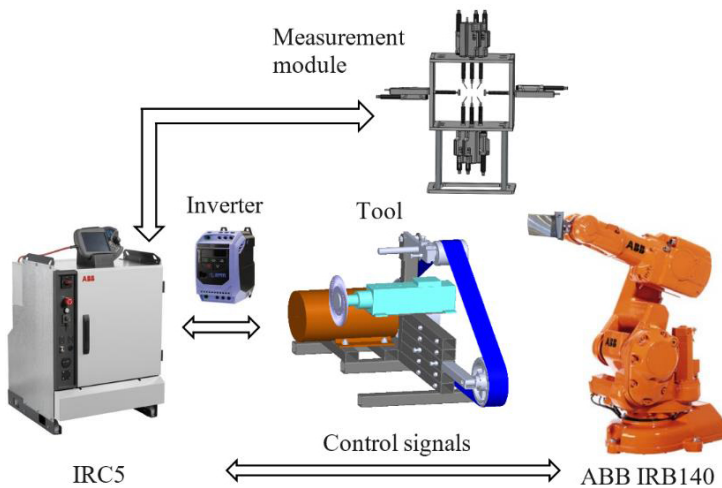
The layout of turbojet engine blades measuring and grinding station
